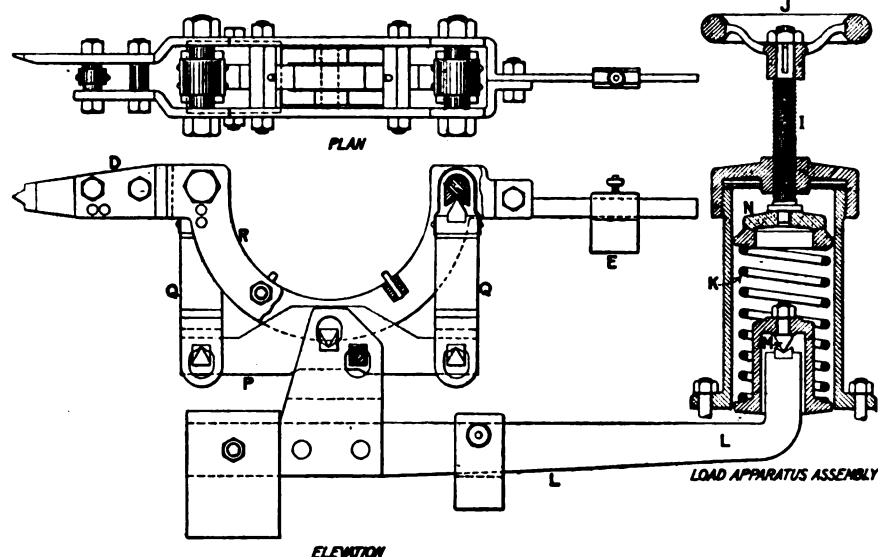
DETAILS OF BEARING CRADLE AND LOADING MECHANISM
